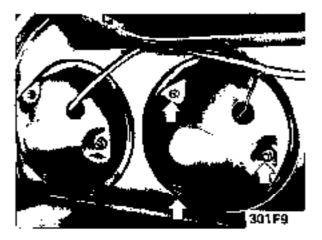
F-9 Tail Light Housing Attaching Nuts -Models 57-578
